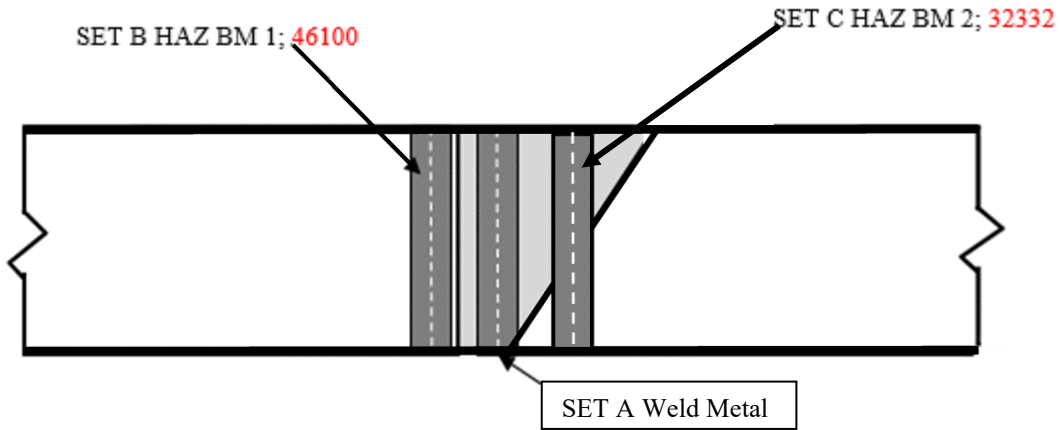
Sketch that illustrates the approximate location of the V-notch centerline (Dashed White Line) for the three sets of specimens, i.e., both HAZs and weld metal.
